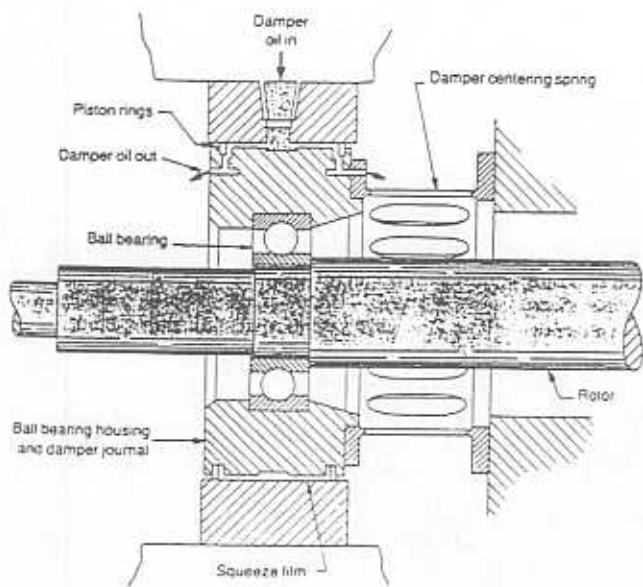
Schematic view of a squeeze film damper and squirrel cage spring.
